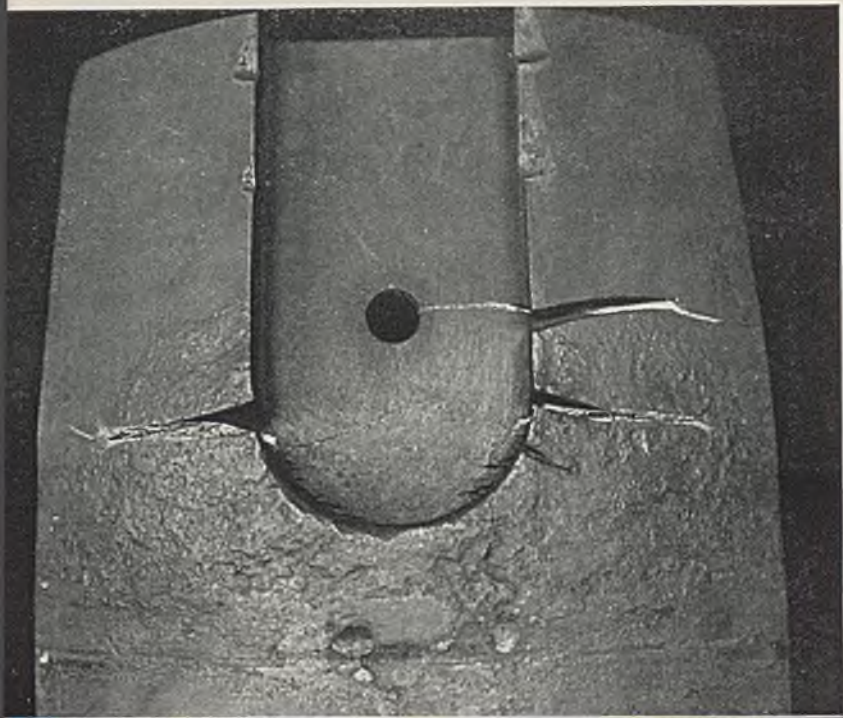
Same Shaft as in Fig. 12, but Showing Additional Corrosion-Fatigue Cracks Revealed by Bending Shaft.
